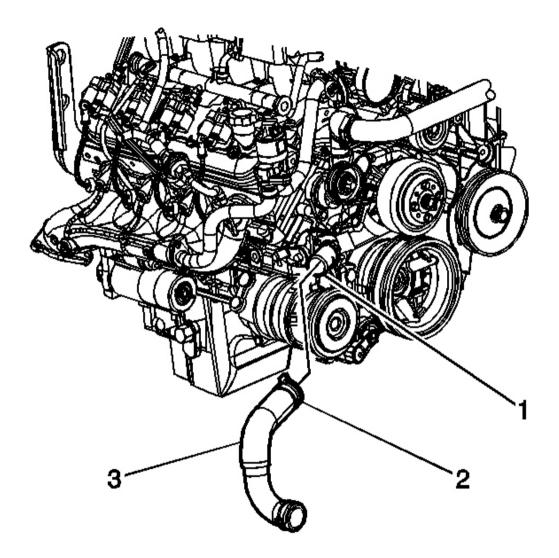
Radiator Hose & Engine (Outlet) Courtesy of GENERAL MOTORS CORP.
